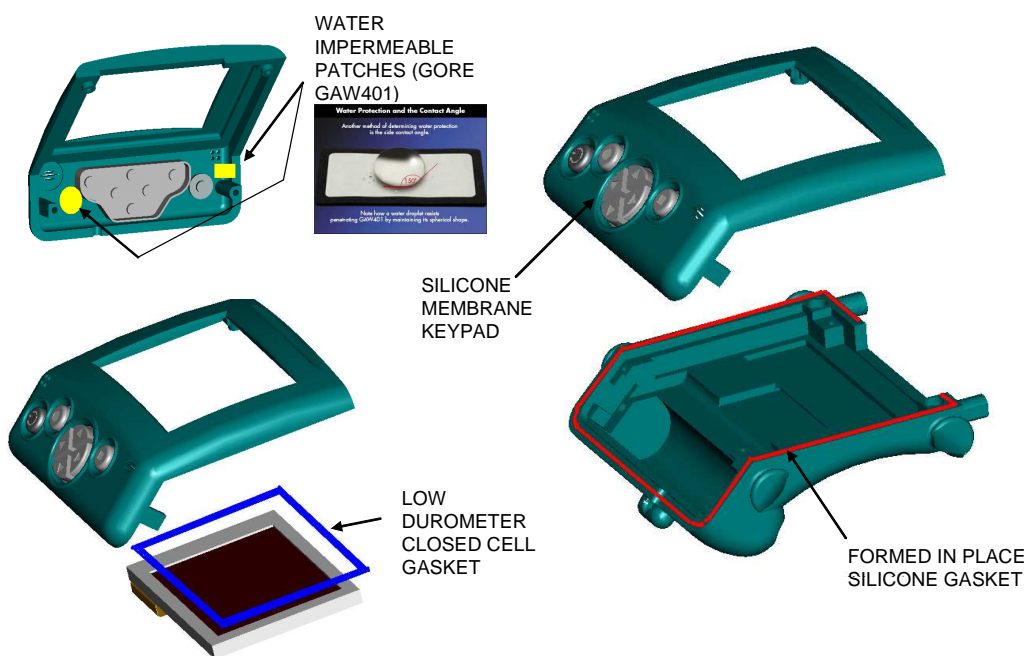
Sealing and waterproofing design features of the Spiral 4 main housing.
